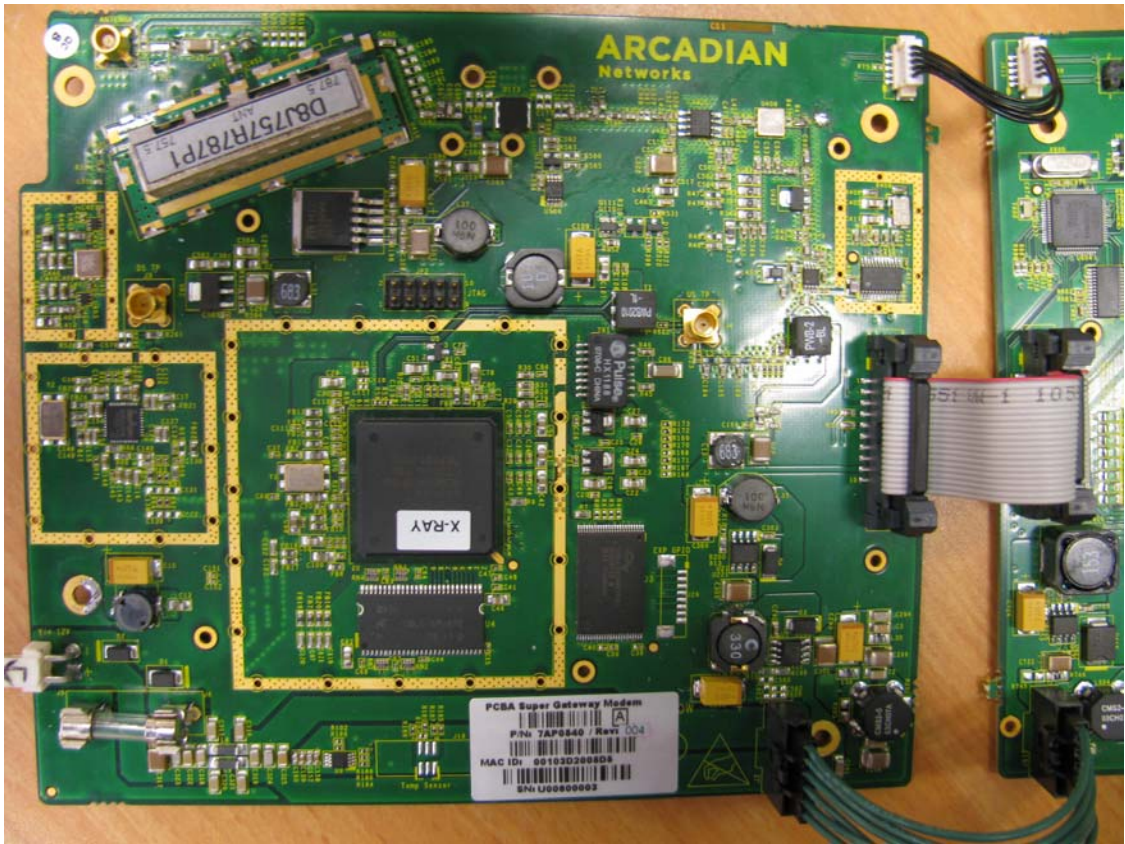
RF of 700 MHz radio & Mother board PCB - CS
